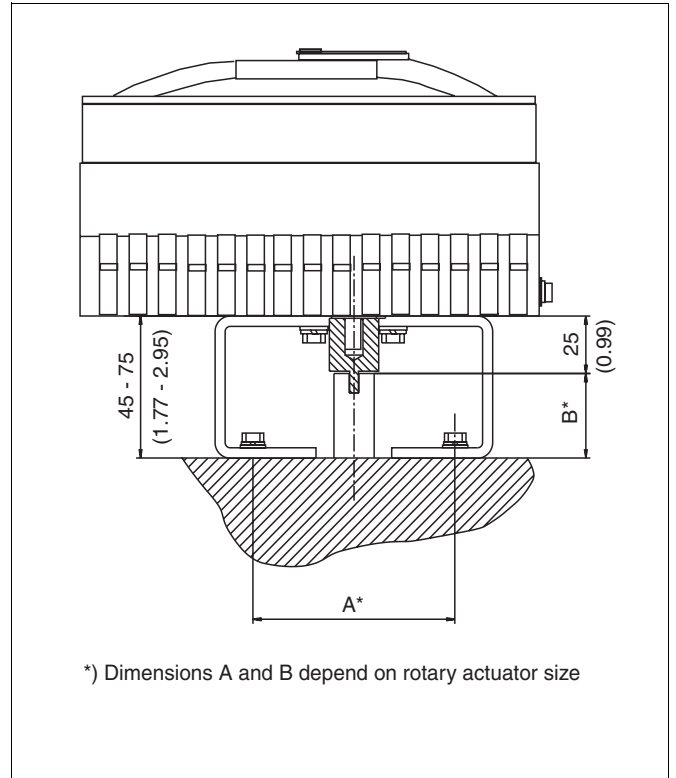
Mounting to rotary actuators to VDI/VDE 3845
